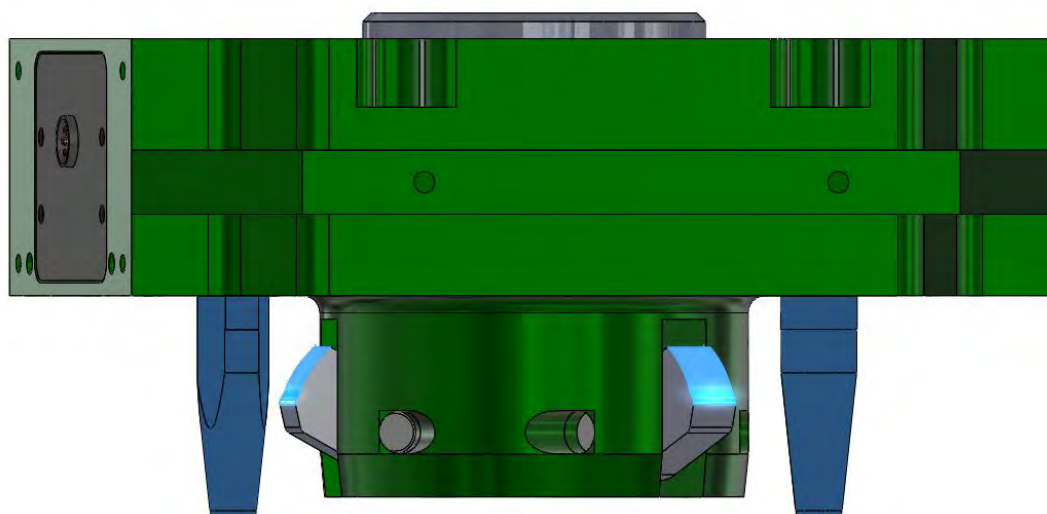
E125 Robot Adaptor Lubrication – Locating Pins & Cams
